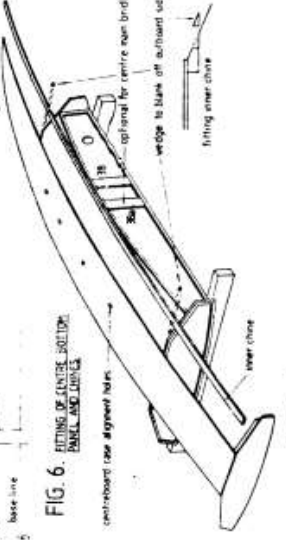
FITTING OF CENTRE BOARD PANEL AND LOWERBOARD
